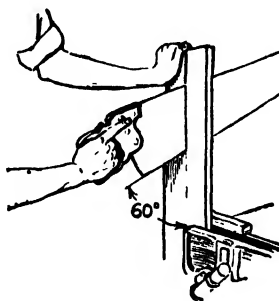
About 60 deg is the correct angle between the saw and the work for rip-sawing. (Stanley Tools)
